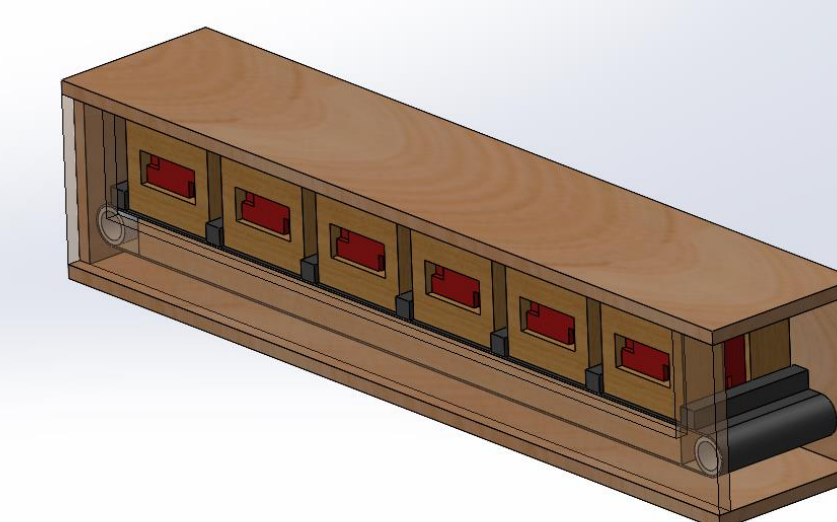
A CAD image of a Balsa Wood Shell containing the conveyor belt system with 6 vaccine vial packages separated by grip pads
